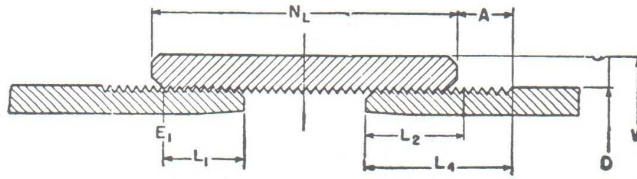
Dimensions of Hand Tight Assembly for Use with Table X3.2
